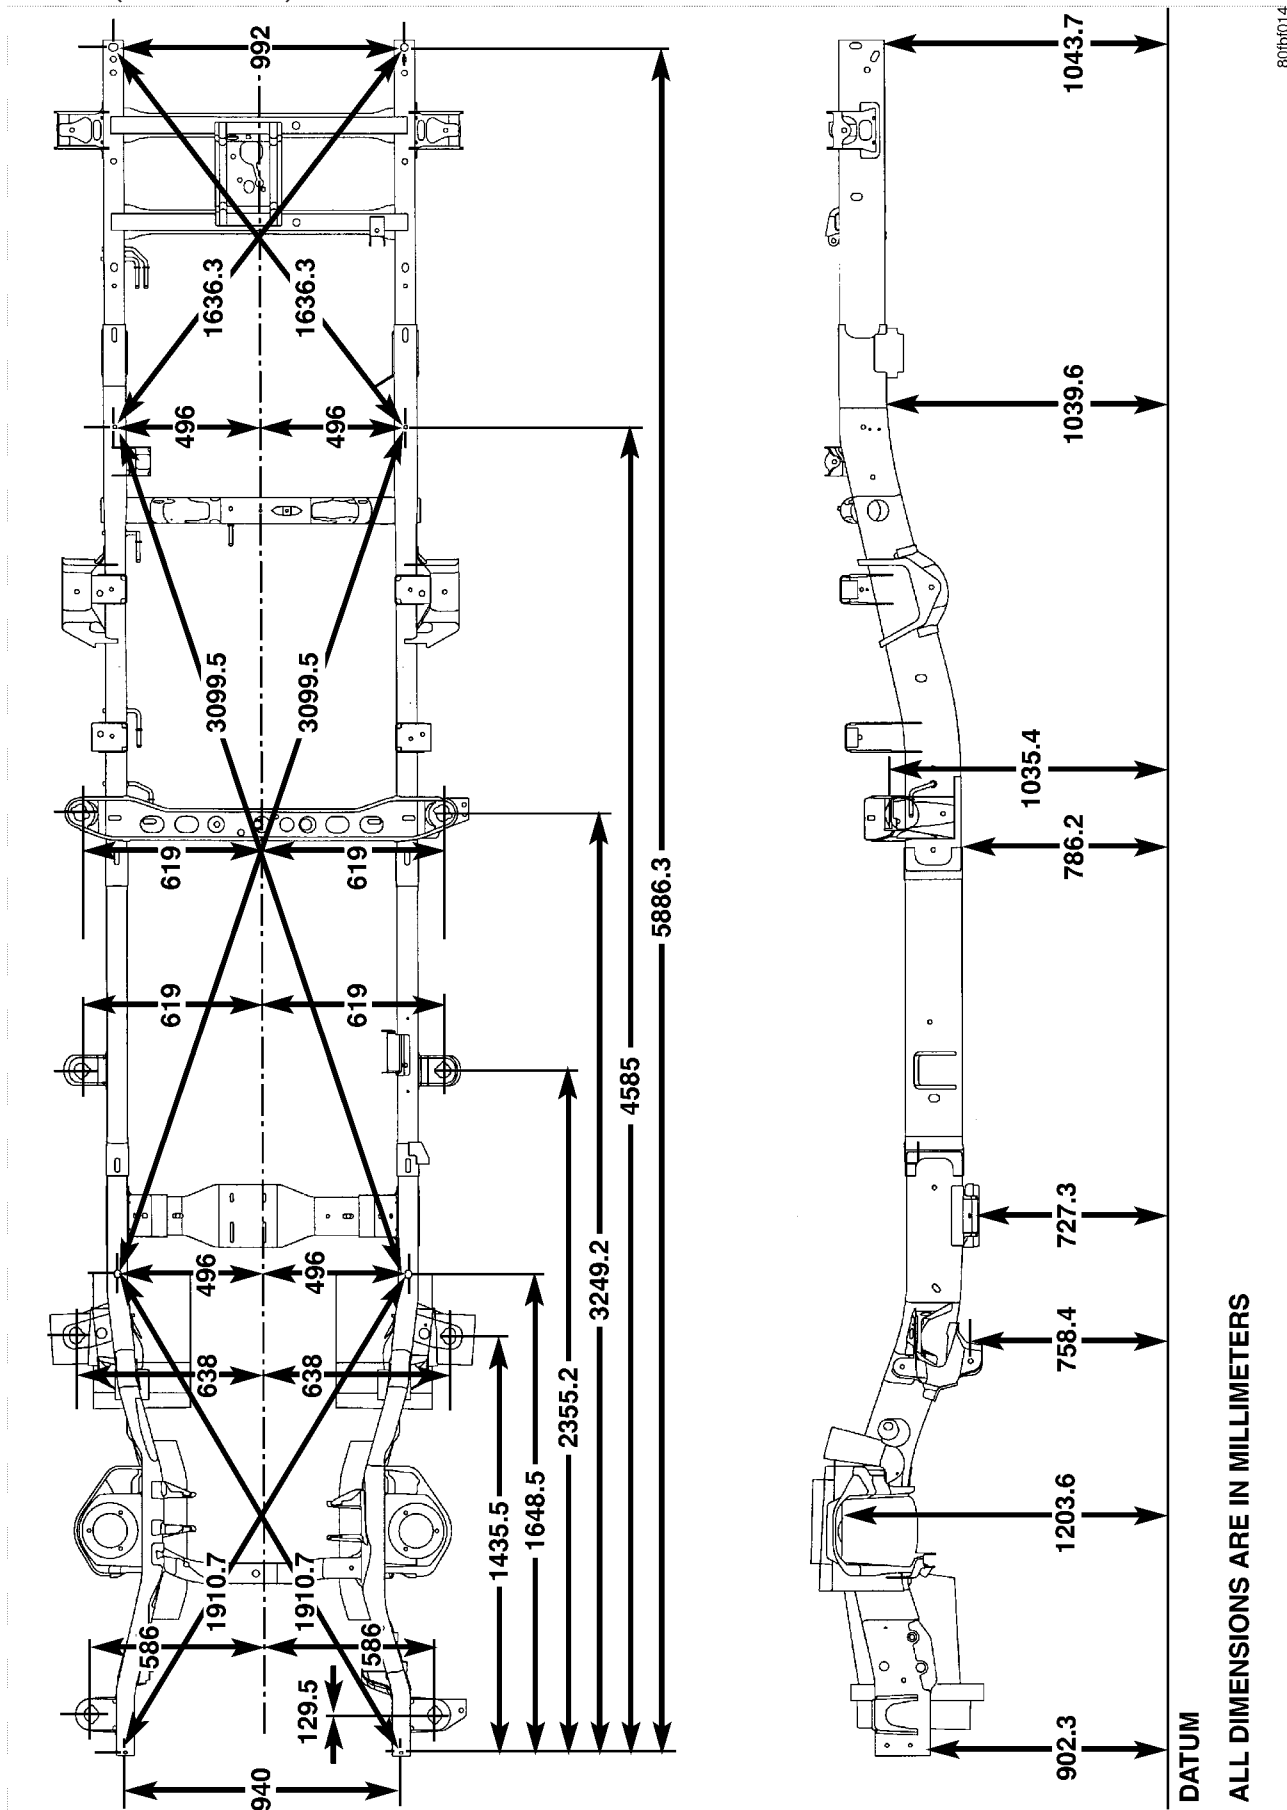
160.5 IN WHEELBASE - HEAVY DUTY - 4 WHEEL DRIVE
